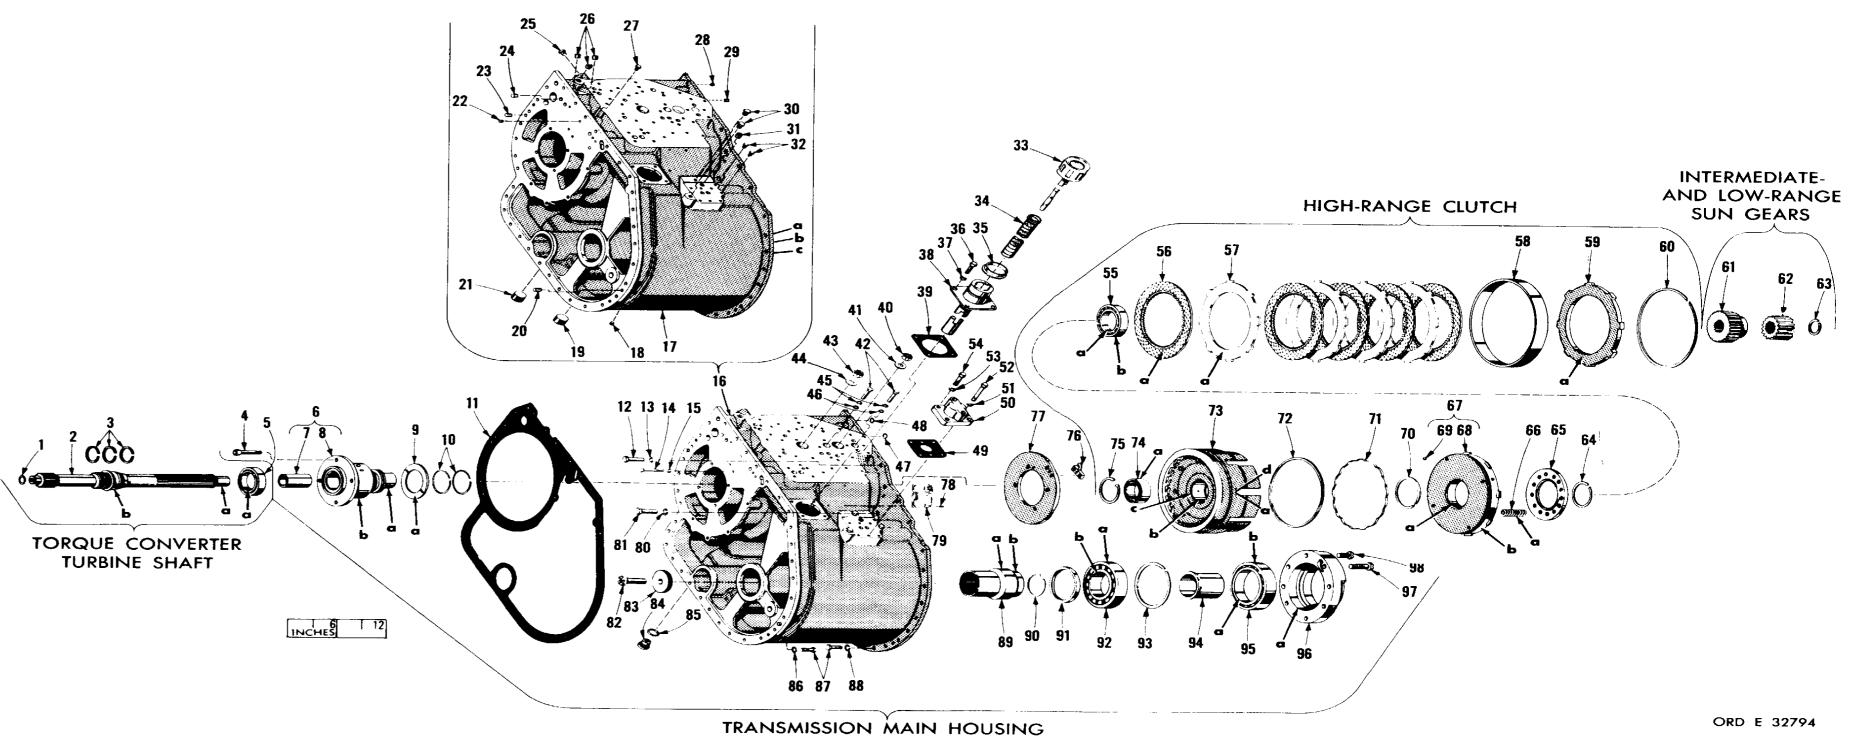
Fold-out 4 — Transmission housing assembly and related parts — exploded view
